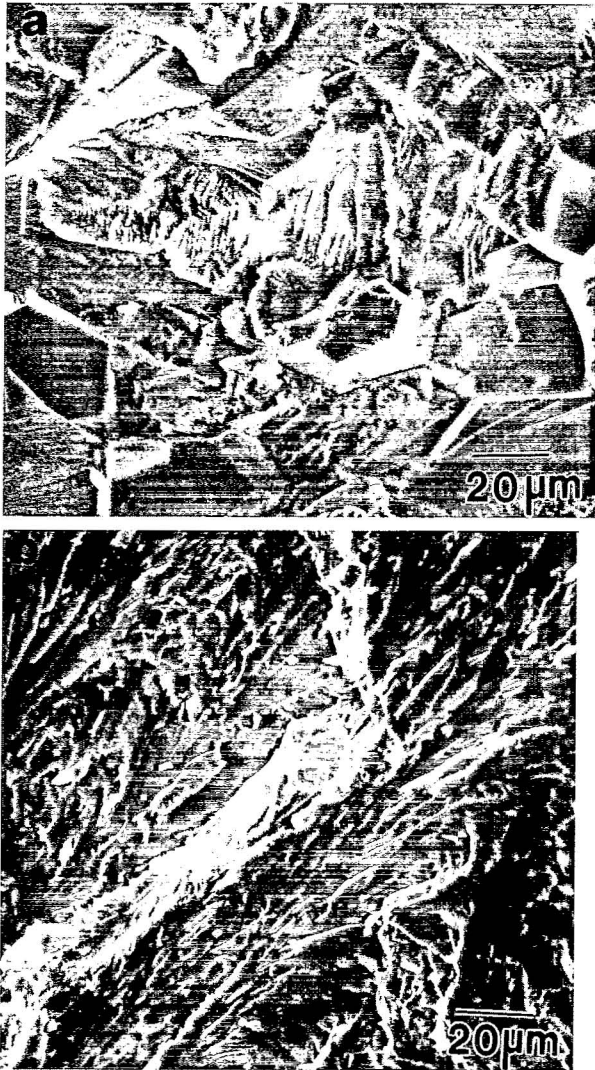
Fracture surfaces of (a) Ni-46Al and (b) Ni-43Al-9.7Cr, tensile tested at room temperature.
